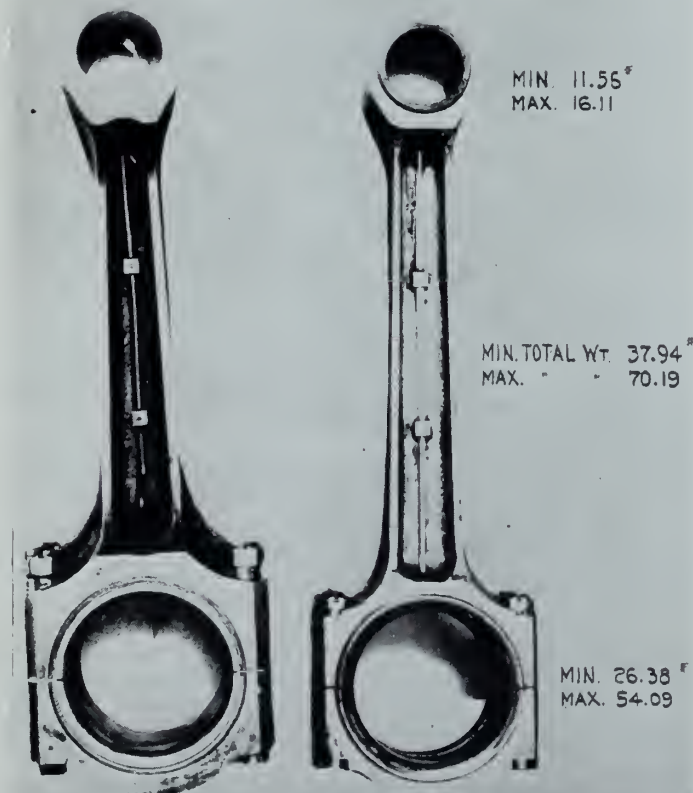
Original (high-tin babbitt) and improved (arsenical-lead babbitt) design for connecting rod bearings.
